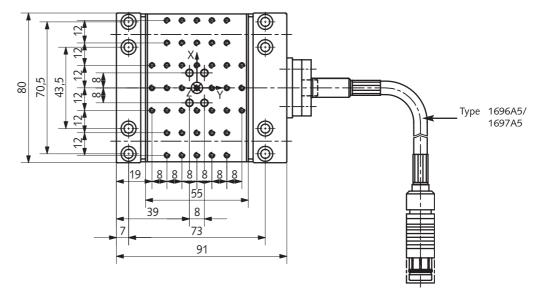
MiniDyn Type 9256C2 with large mounting plate
